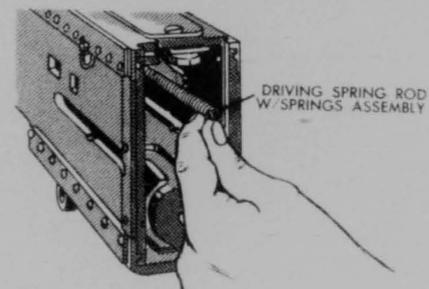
Removing Driving Spring Rod w/Springs Assembly.
